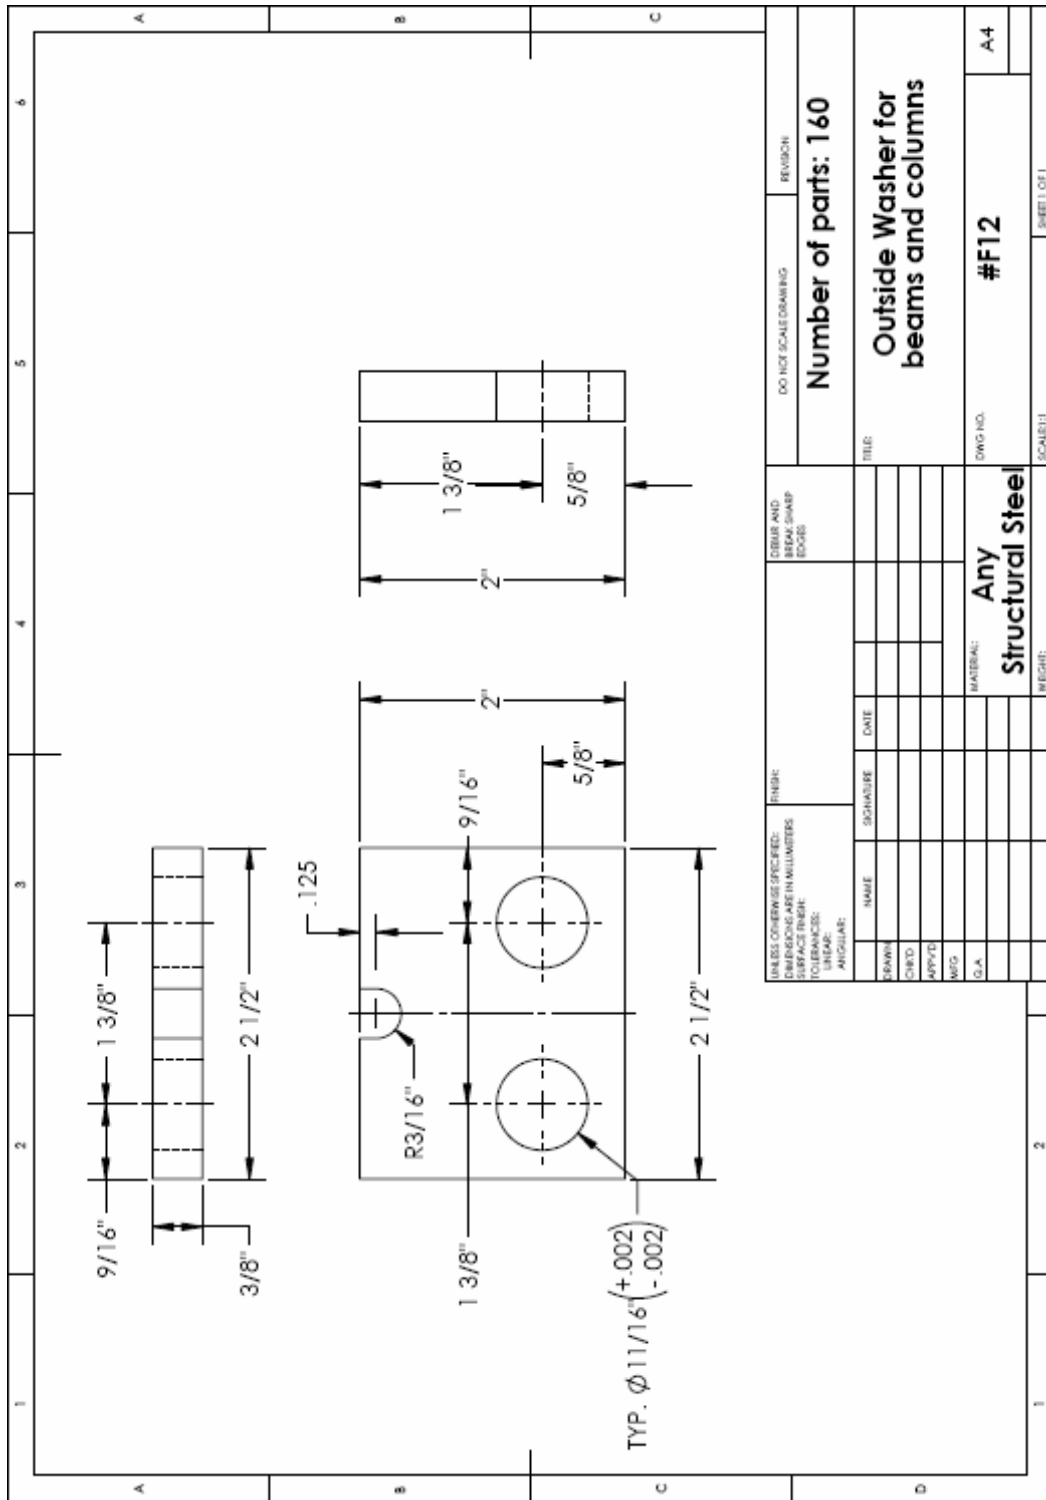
Outside washer for beam and column plastic hinge elements of test frame
